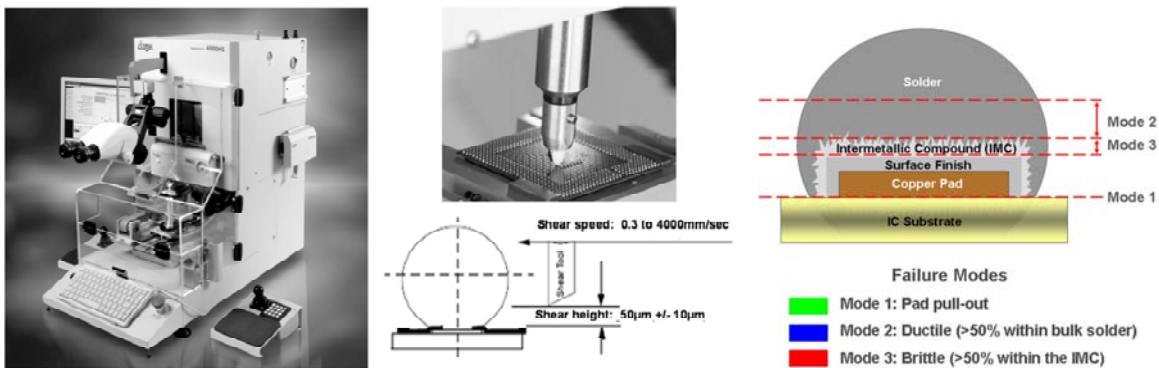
Dage 4000HS High Speed Bond Tester (left) with detail of ball shear device (upper center) and illustration of ball shear mechanism (lower center) and failure mode description (left)
